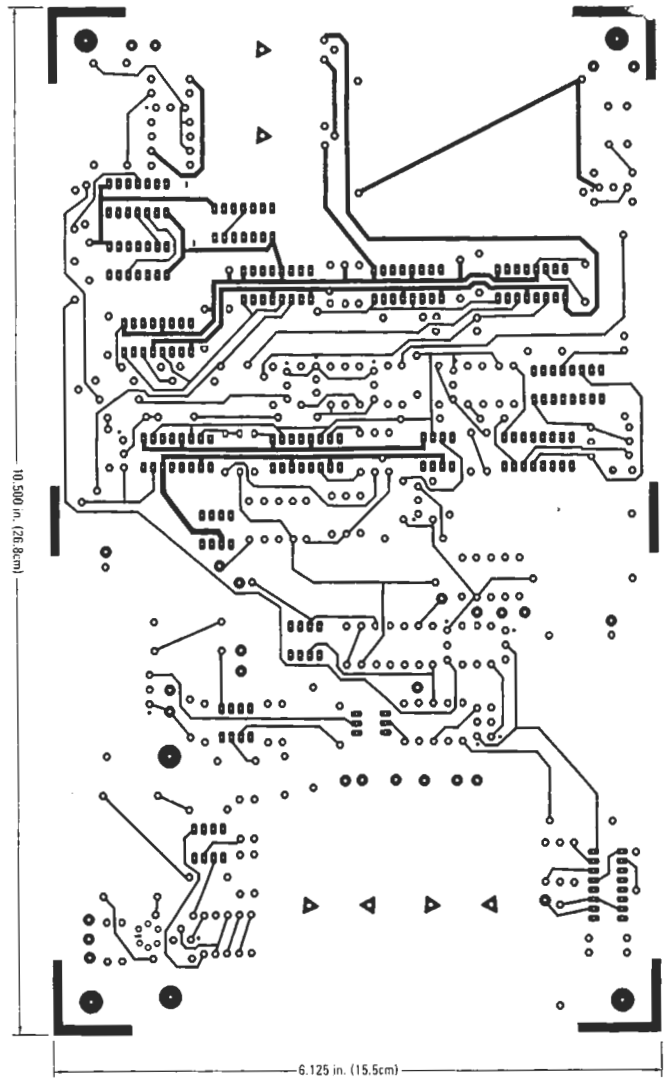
PRINTED-CIRCUIT BOARD foil pattern of the component side of the double-sided board shown half-size.
